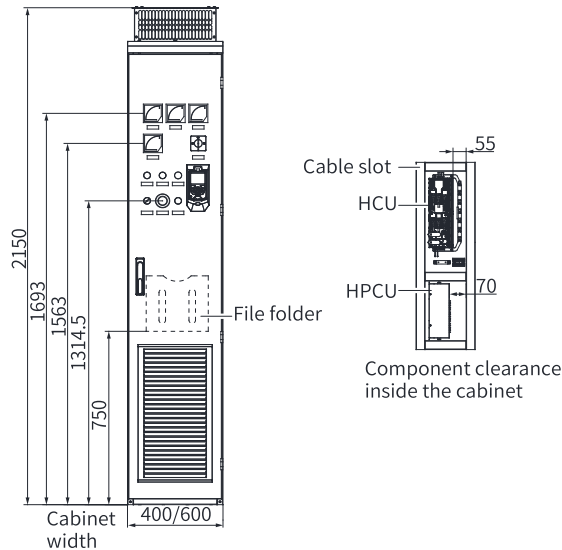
Dimensions of auxiliary cabinet (mm)
